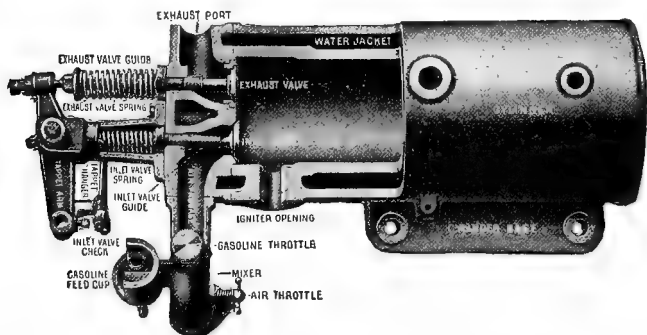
Sectional View of I. H. C. Engine Cylinder, Showing Water Jacket and Valve System.
